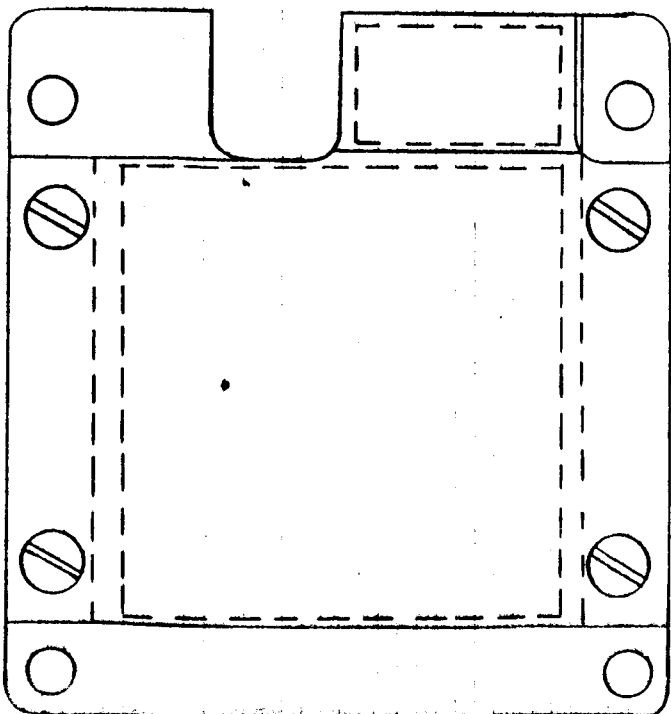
shows the two stage thermoelectric module assembly. Six such assemblies are used in the IHFSU system. Each assembly is a self contained unit with a removable copper sample plate. Four screws hold this plate to an upper copper heat sink to which the upper thermoelectric element is soldered. In addition this upper thermoelectric element is soldered to a middle copper heat sink. The lower thermoelectric element is also soldered to this middle heat sink and to a lower copper heat sink. The lower heat sink has a relatively large mass to provide good heat conduction away from the assembly. Screws are used to attach the lower heat sink to the large aluminum block providing for easy replacement of the module assemblies.
